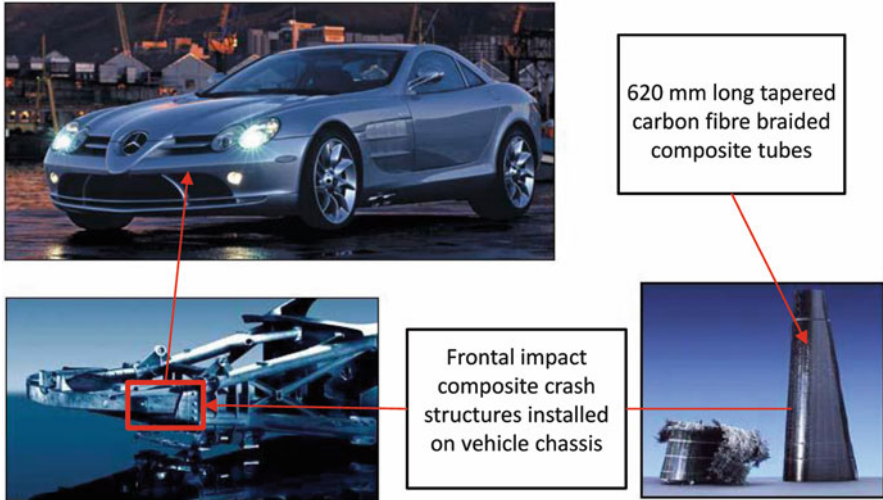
McLaren Mercedes SLR bumper tube [29]
